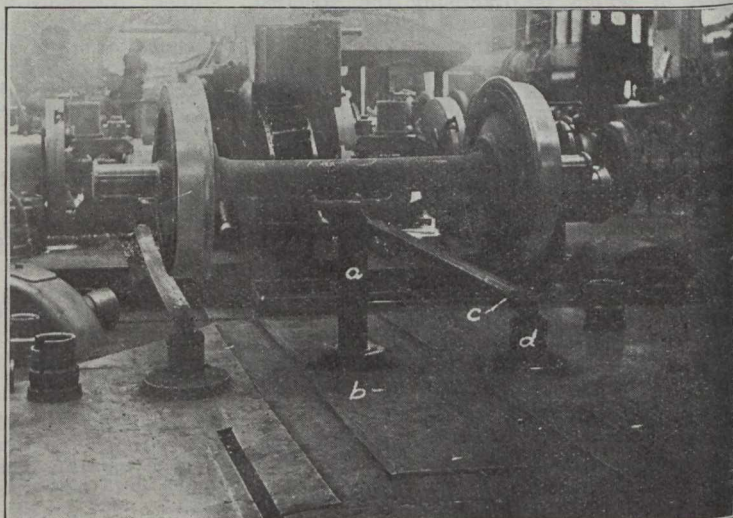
Mounting Wheels in Passenger Car Wheel Lathe.
